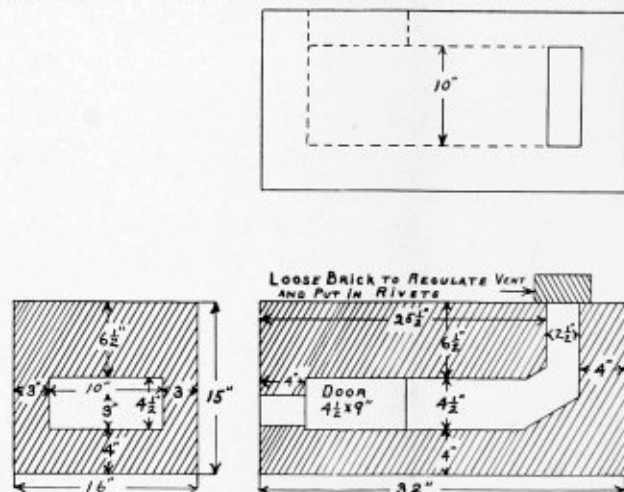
ARRANGEMENT OF FORGE USED WITH BURNER SHOWN IN FIG. 1.
